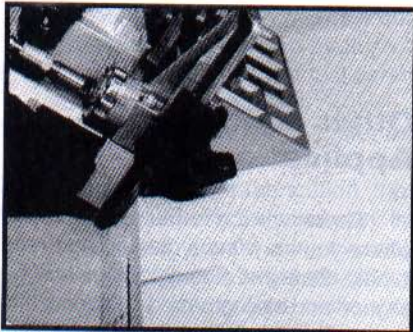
Cutting the edge miter with the JS100; this machine matches the joints from the inside of the stock.
